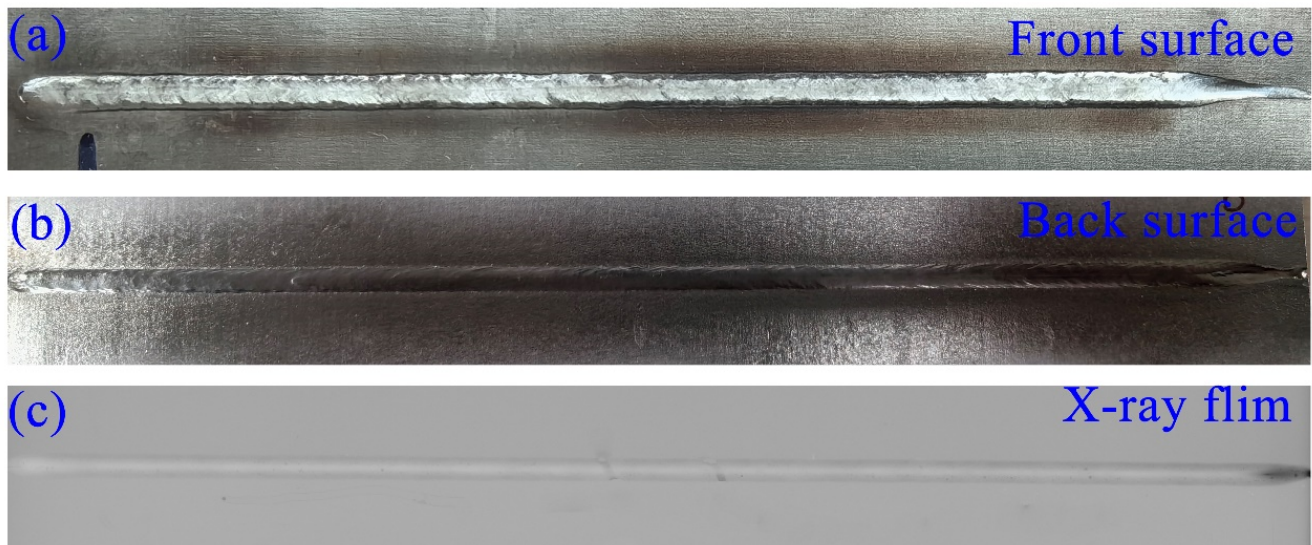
Macro-morphology and X-ray inspection image of welded joints: (a,b) front surface and back surface morphology and (c) X-ray film. (Experimental parameters: $P = 3.0$ kW, $v = 1.2$ m/min, $F = +20$ mm).
